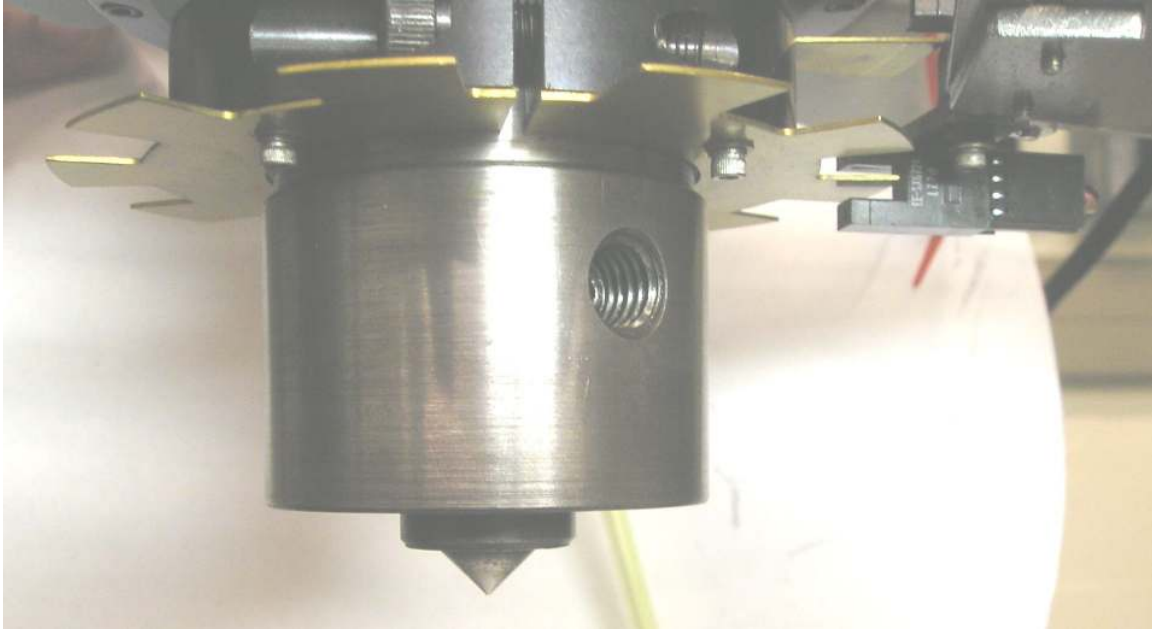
A shoulder-less, conical tool (90° inclusive angle) used in the experiment
